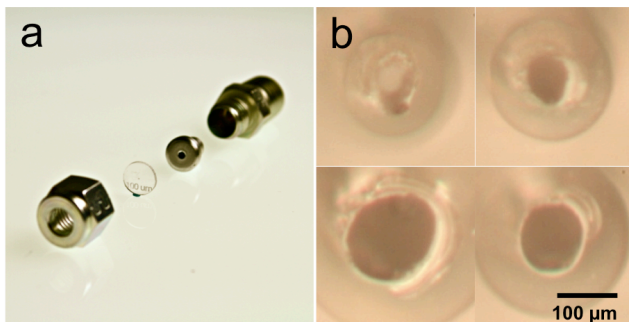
Photographs of the nozzle assembly. (a) The outer housing of the compression fitting houses an acrylic disk and a custom-machined aluminum piece to mate to the compression fitting surface. The result is an assembly capable of housing (b) acrylic disks of different diameter orifices (here shown clockwise starting from upper left: 40, 60, 100, 150 μm) at a high pressure.
